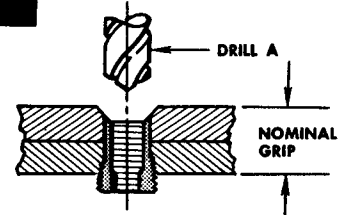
Installation of Deutsch Drive Pin Rivets
